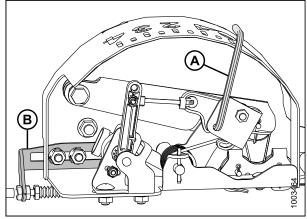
Float Indicator Box (Most Common 5 Volt AHHC Sensor Assembly Shown)
